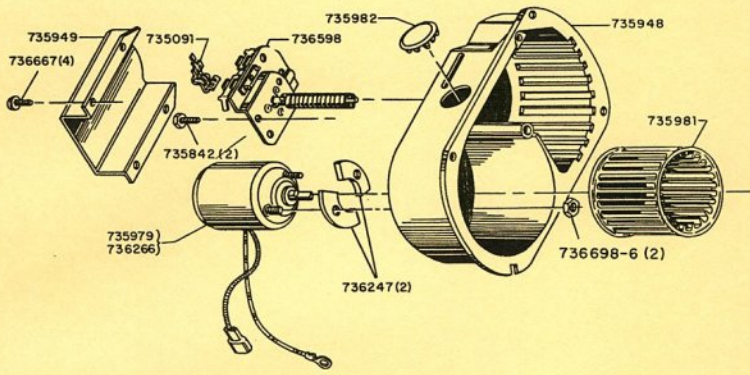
VENT AIR BLOWER ASSEMBLY 735945-736488 & 736654
